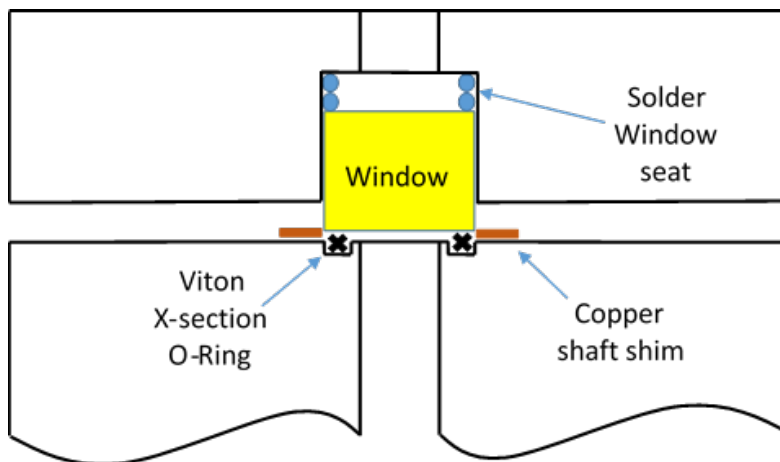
Assembly schematic of alternate window sealing materials for the chamber. Relative sizes of the chamber components are not to scale.
